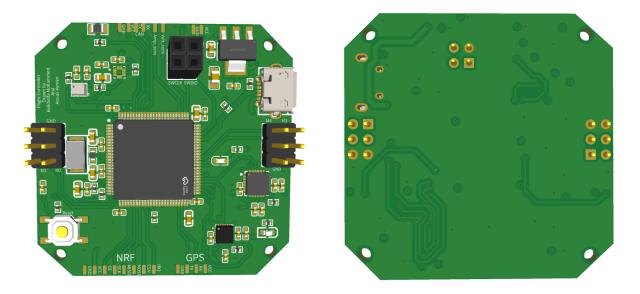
3D Pcb flight controller Top And Bottom View
